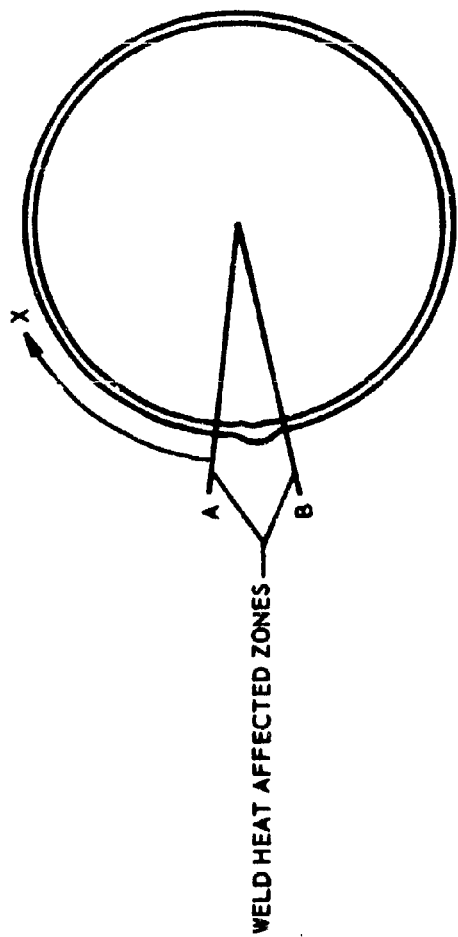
EXPLOSIVE FORM WELD TEST SPECIMEN - THICKNESS REDUCTION AT MAX. DIA. FOR 12 PERCENT EXPANSION (SHEET 2)
